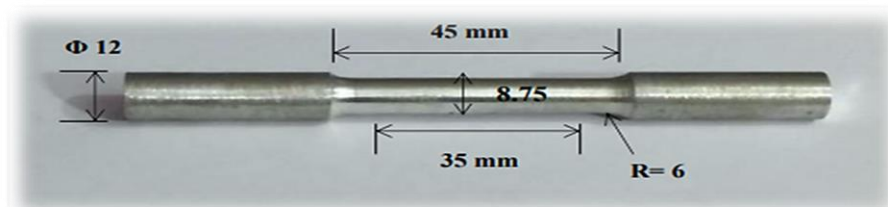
Tensile test specimen according to (ASTM A370), All dimensions in (mm)
